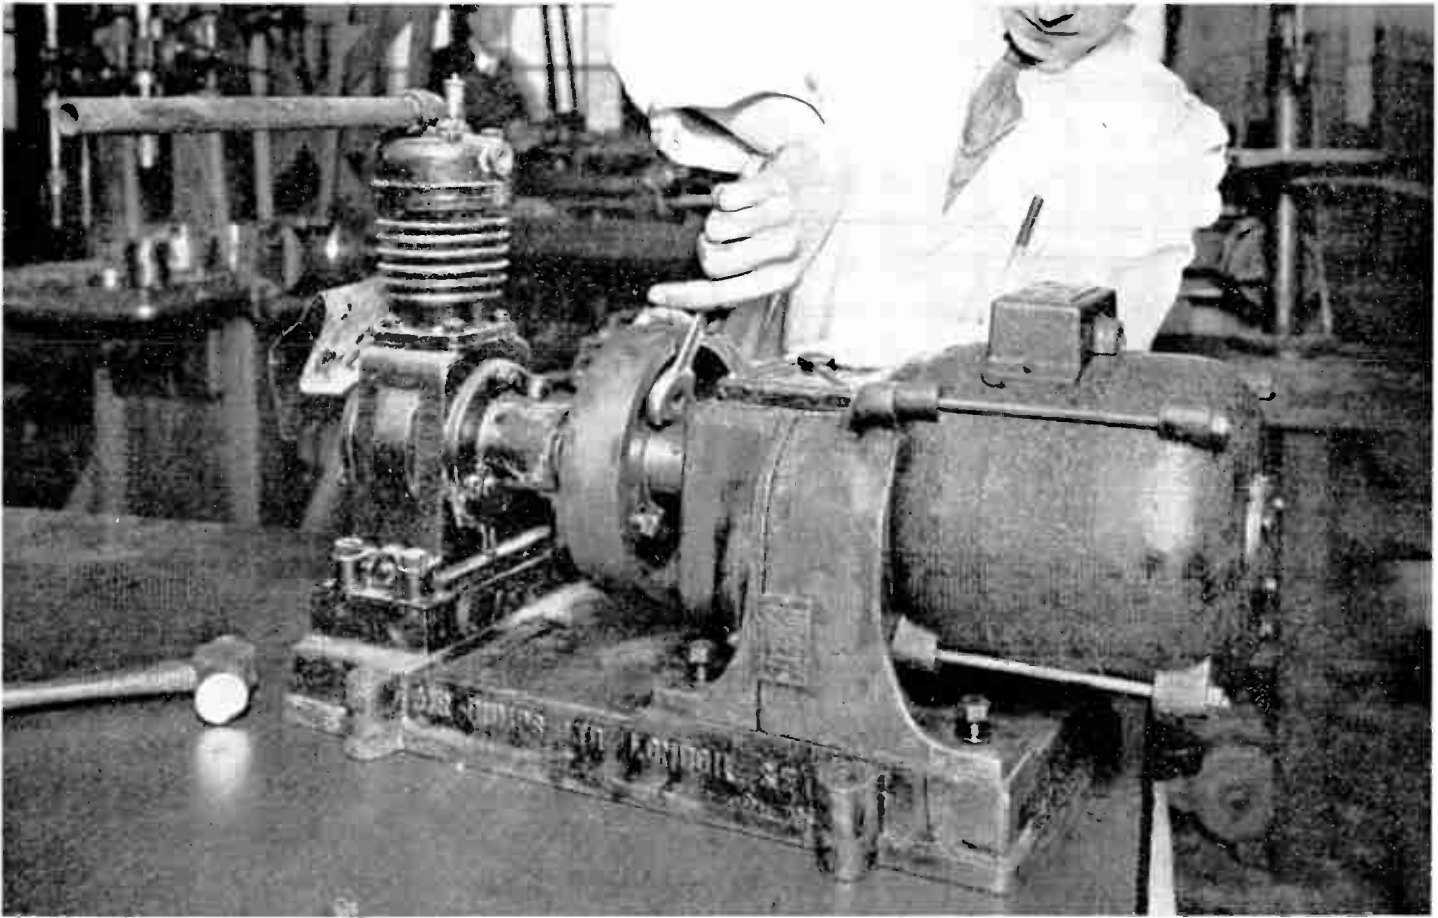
FITTING A COUPLING TO A GEARED MOTOR SHAFT.
